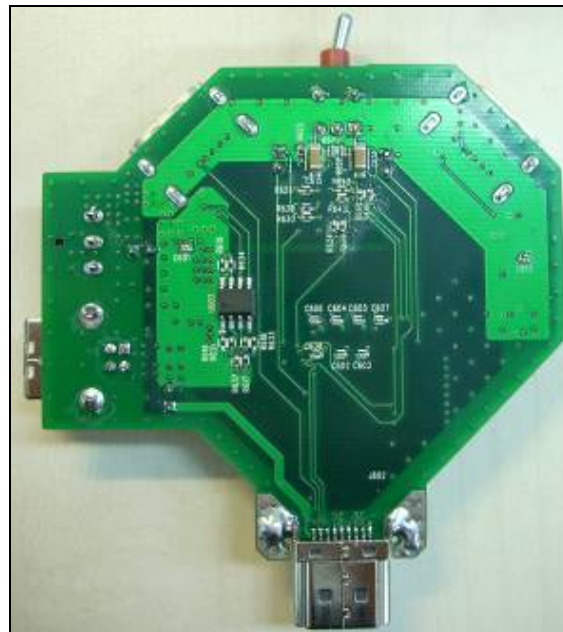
Bottom View of PI3HDMI201 HDMI-HDMI Demo Board
